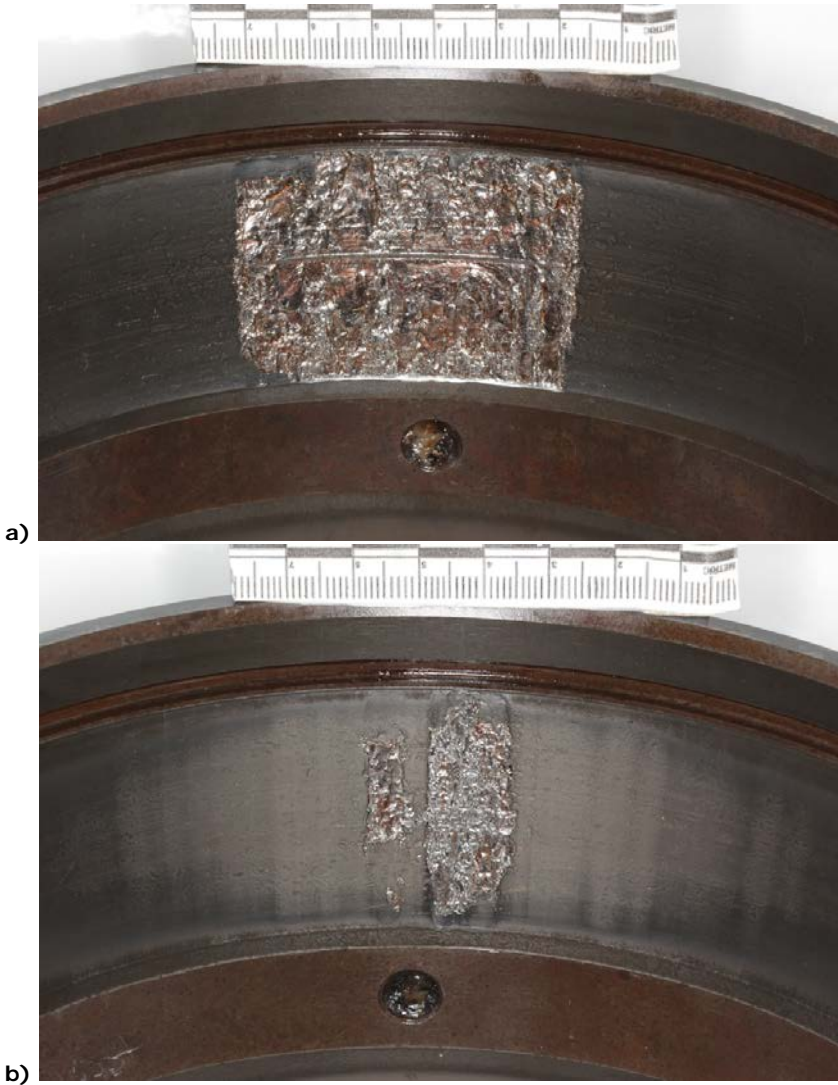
Examples of damage on the outer race for a) bearing A and b) bearing B.
